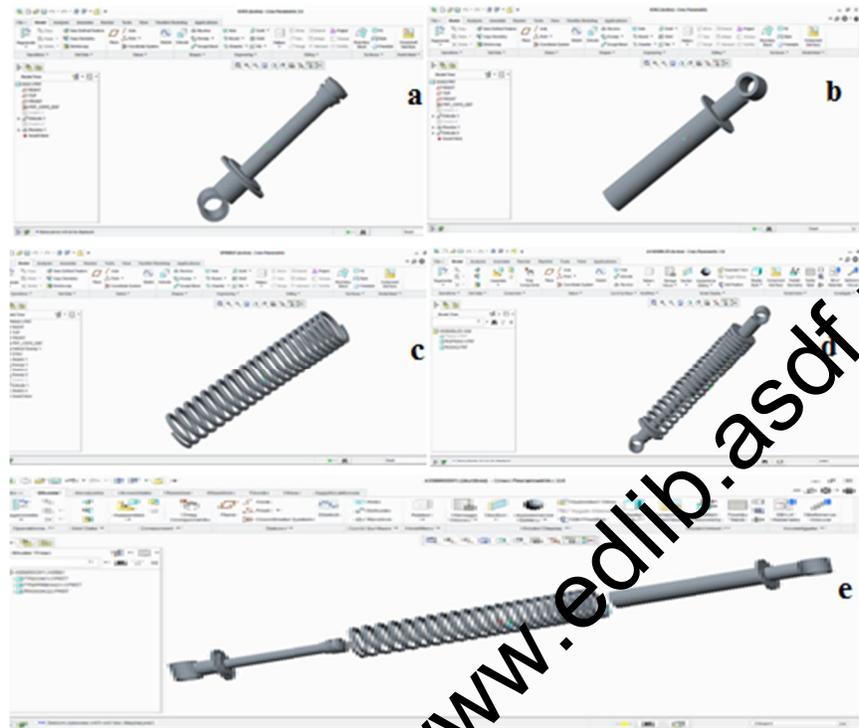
a) Bottom Part b) Top Part c) Helical Spring d) Total Assembly e) Exploded View
